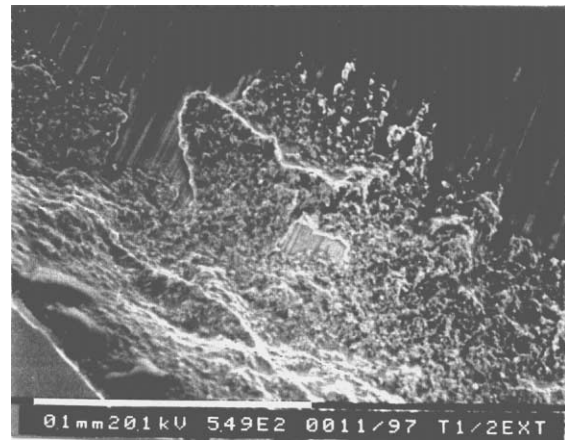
An SEM image showing adhered tool material at the lower end of a chip which was produced by Tool A after cutting for 5 s at 50 m/min and 0.08 mm per tooth.
